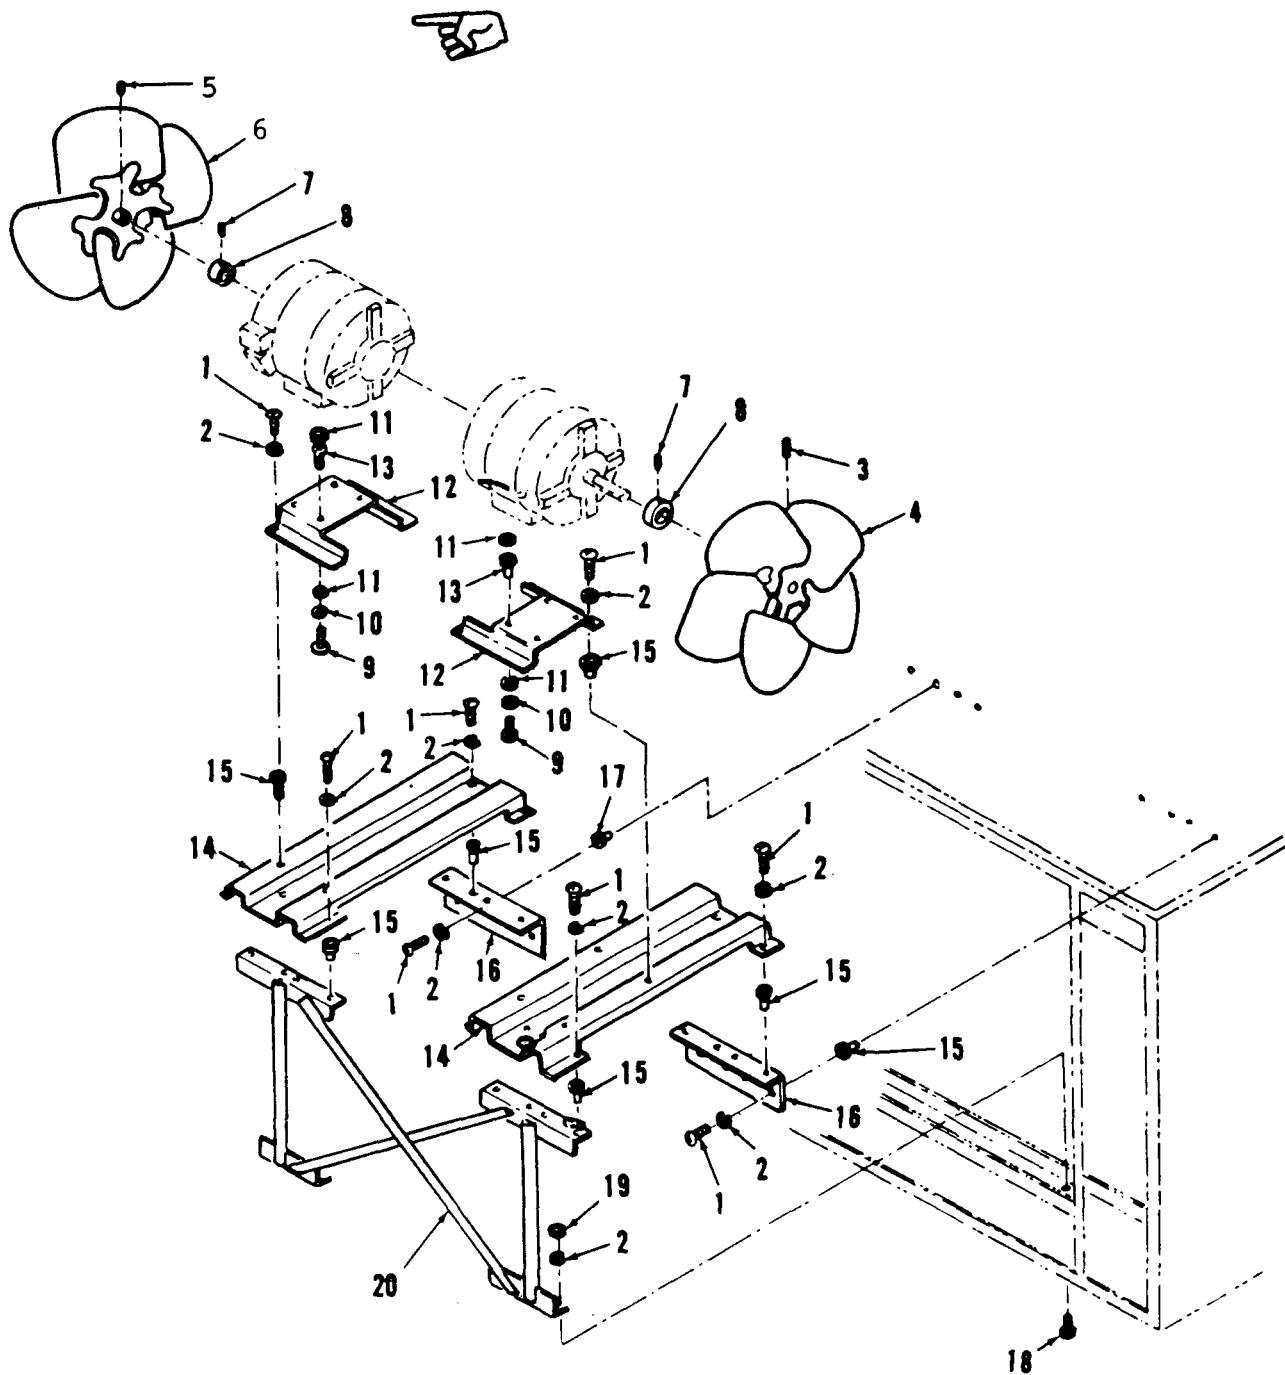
Fan and Support Assembly, Condenser Fan Motor
